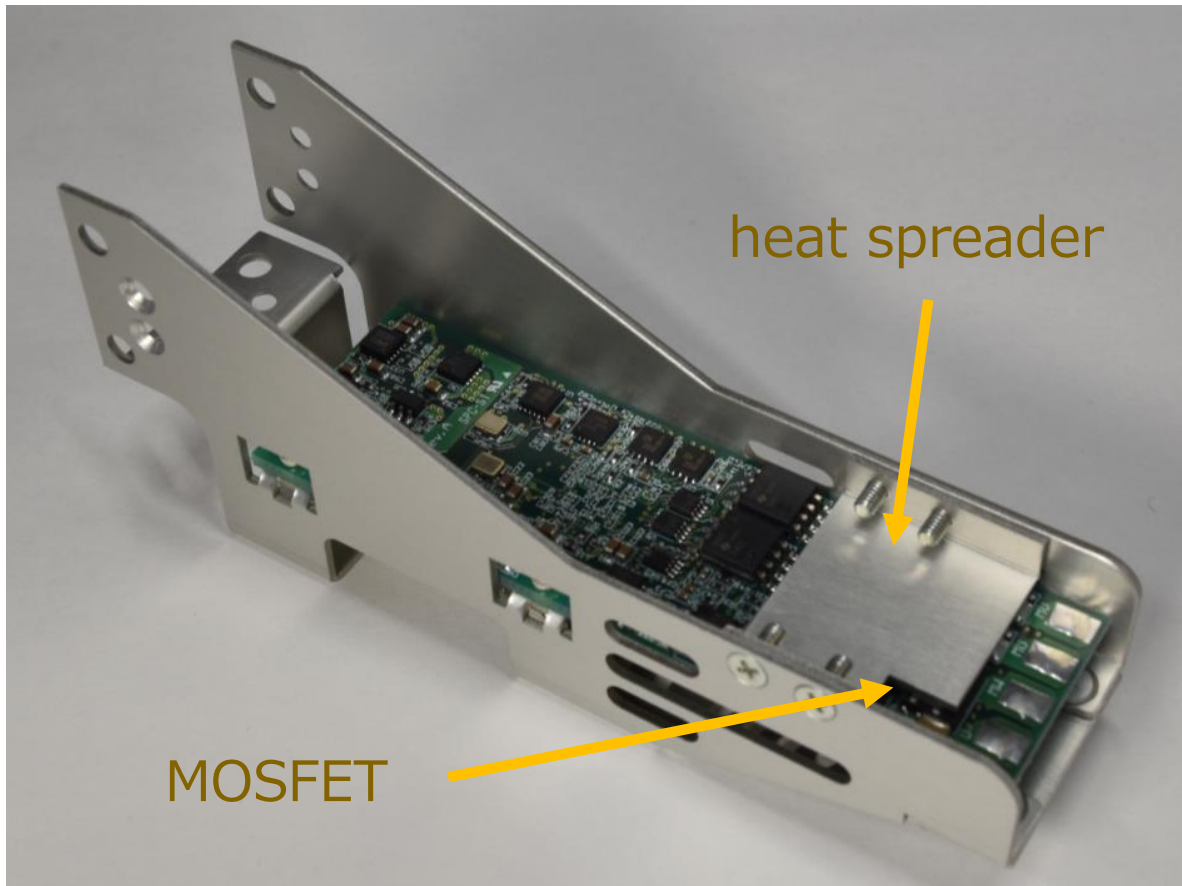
Heat spreader structure in the wire actuator module with the motor driver board FPGA-03D
